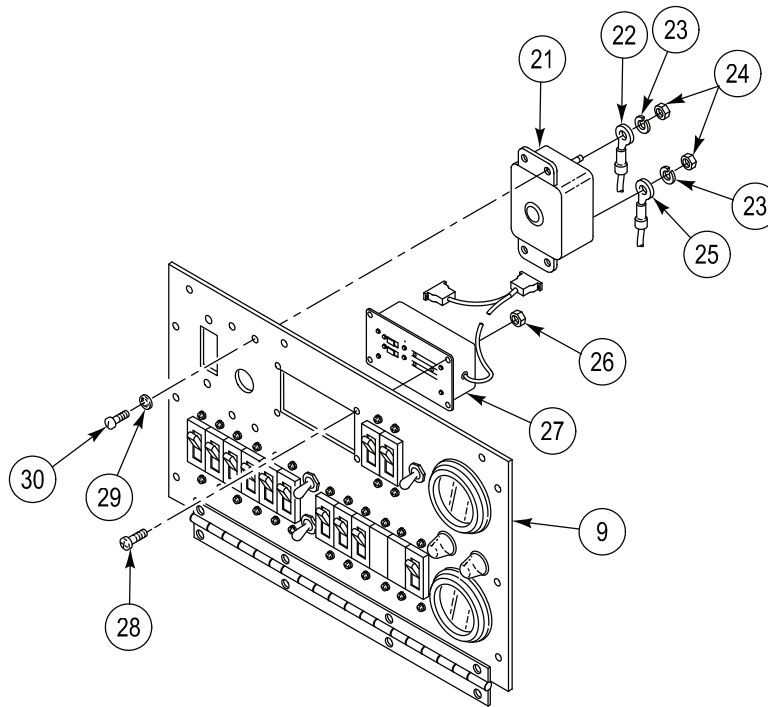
Faceplate Circuit Breaker CB2/Harness Disassembly
